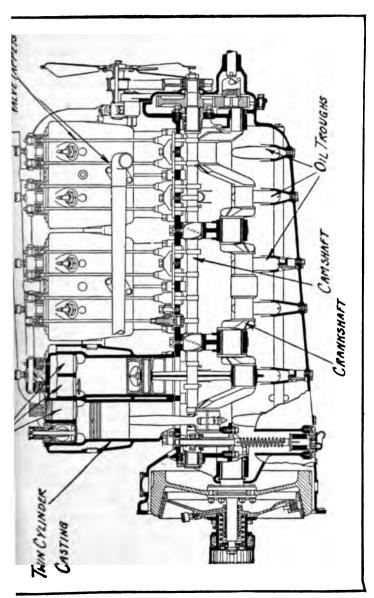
Part Sectional View of Six Cylinder Butck Motor, Showing Method of Valve Mounting in Eastly Removable Valve Cages. equally bad seat, which is an almost hopeless job, and of u coarse emery and bearing down with all one's weight on grinding tool with the hope of quickly wearing away the ro surfaces. The use of improper abrasive material is a fertile coof failure to obtain a satisfactory seating. Valve grinding is a difficult operation if certain precautions are taken before untaking the work. The most important of these is to ascert
